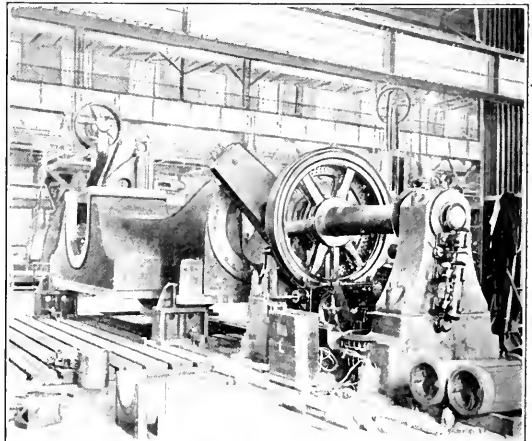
Machine for Facing, Boring and Drilling Cylinder Ends, Etc.
